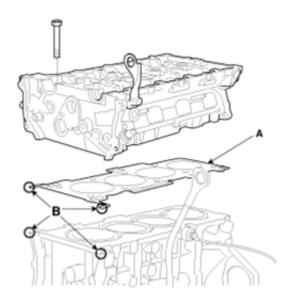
Identifying Cylinder Head Gasket & Liquid Gasket Application Areas
